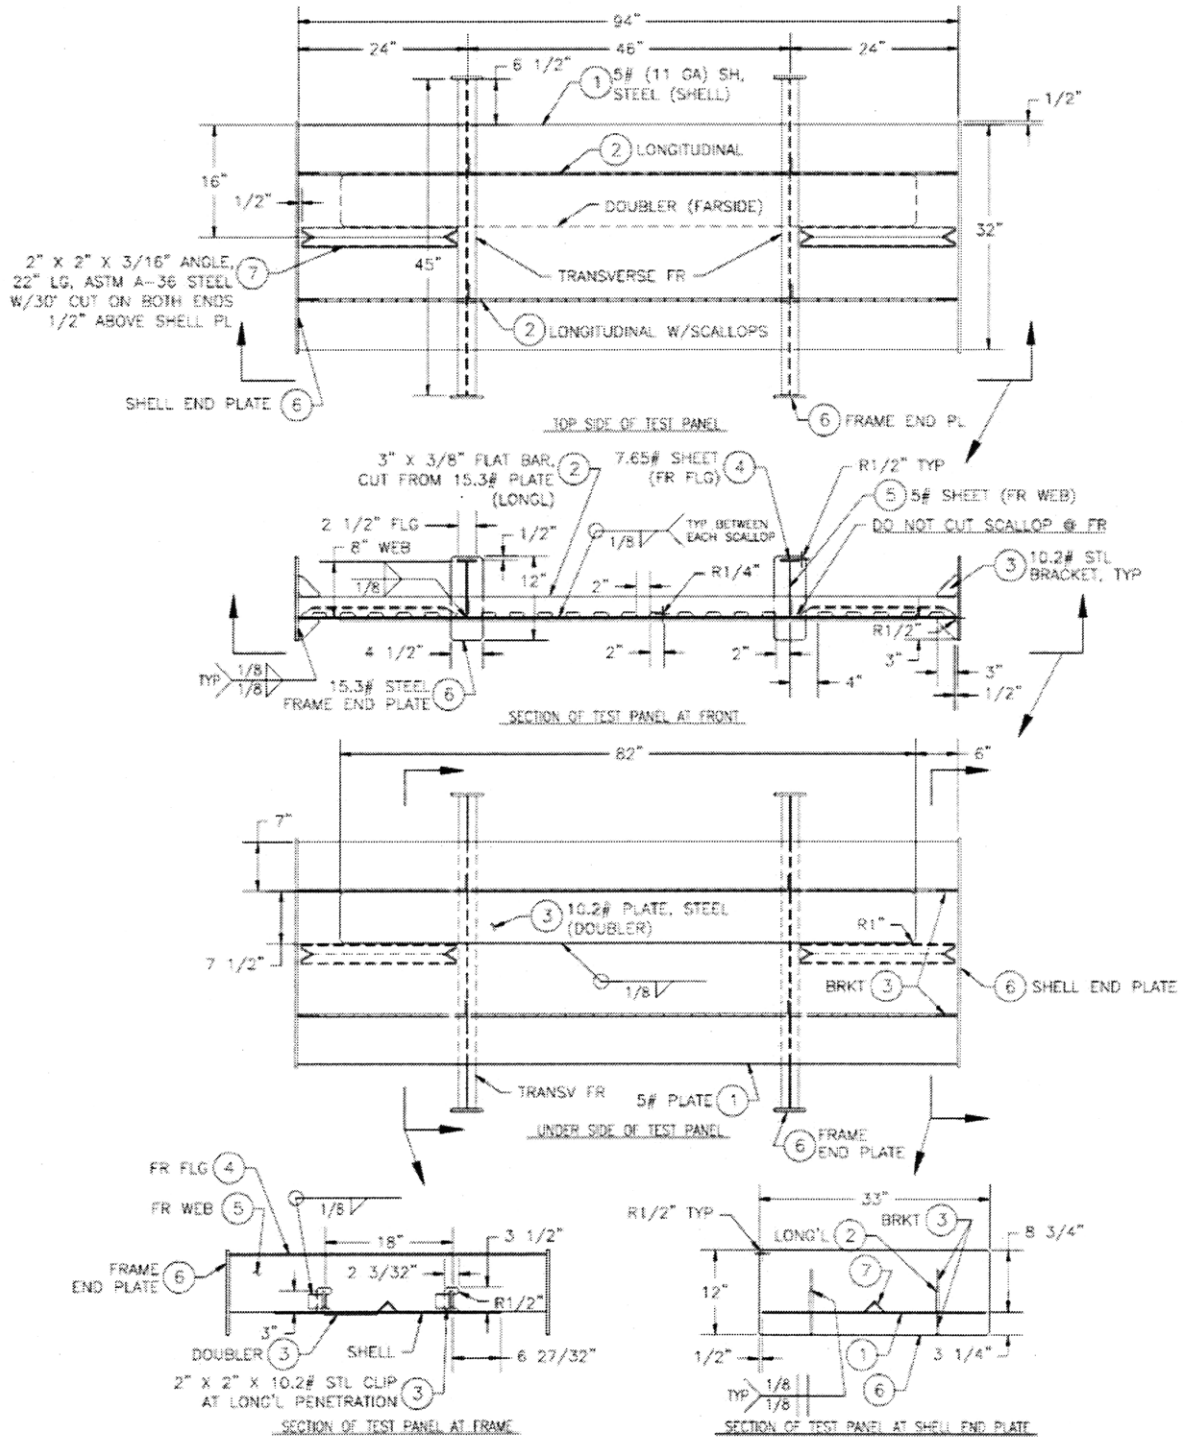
U.S. Coast Guard Construction drawing of the Test Panel used in the July 2006 U.S. Naval Academy Test
